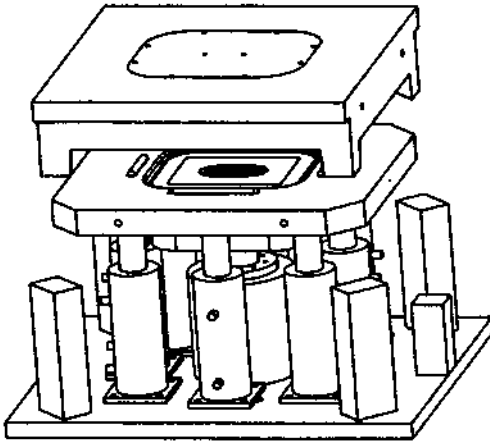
Blank holder force control using hydraulic cylinders in a rectangular tool.
